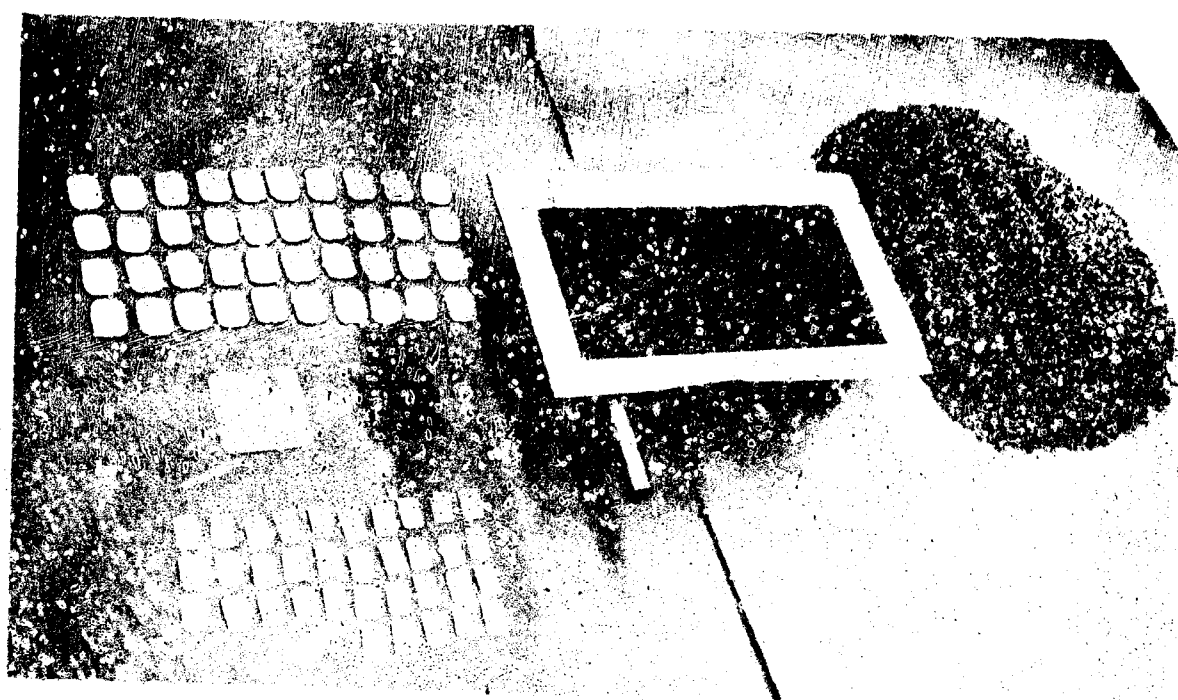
VACUUM VANADIUM COATING RETORT SPECIMENS AND PACK MATERIAL
